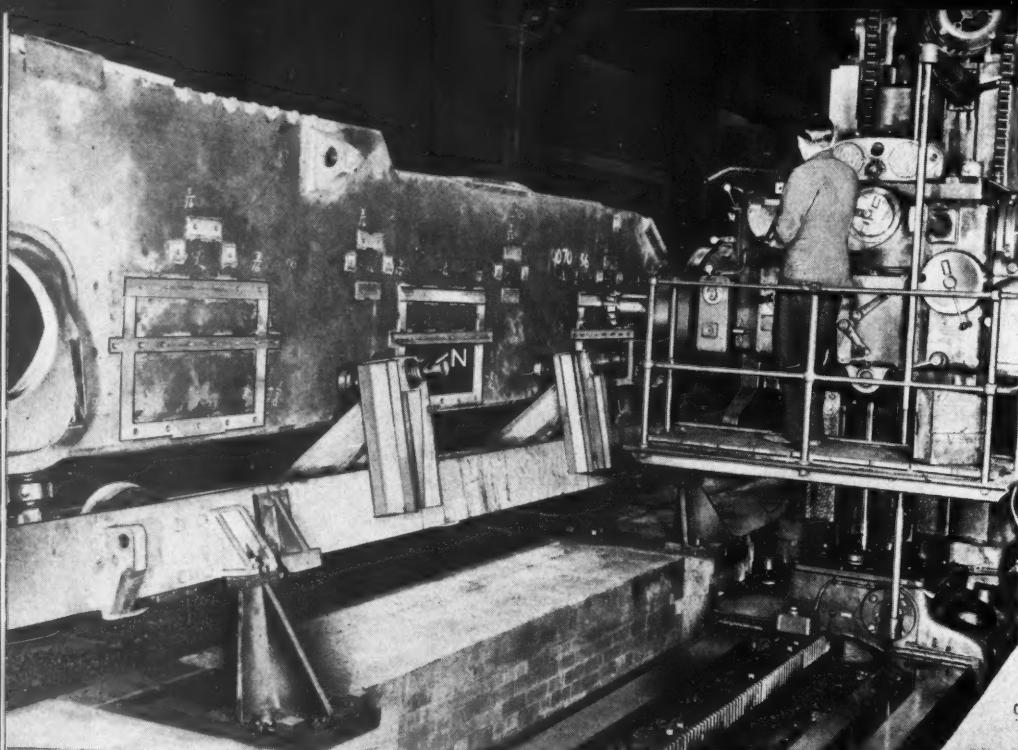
The bogie jig on which the tank hull is mounted is tilted to an angle of 12 degrees for milling the suspension bracket facing strips
